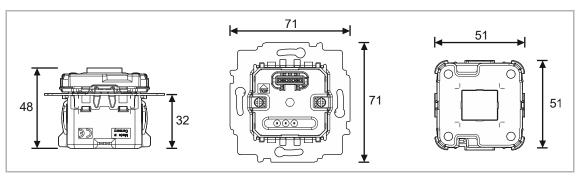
Dimensions of all described device types (all dimensions in mm)
